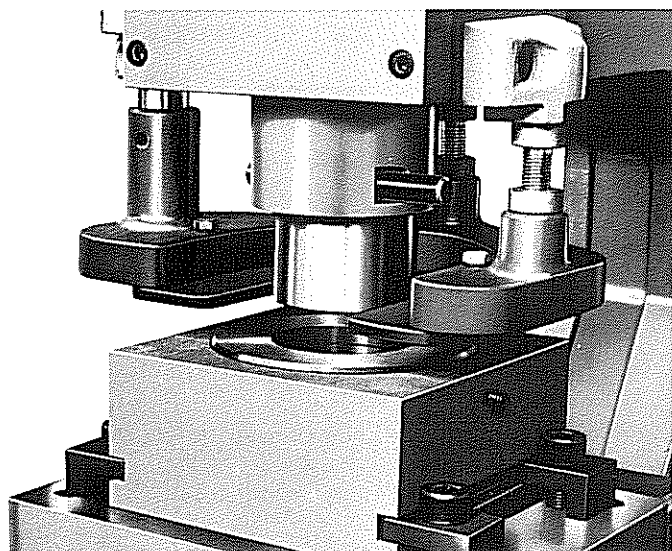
Special punching equipment accommodating punches and dies with diameters exceeding 50,5 mm
